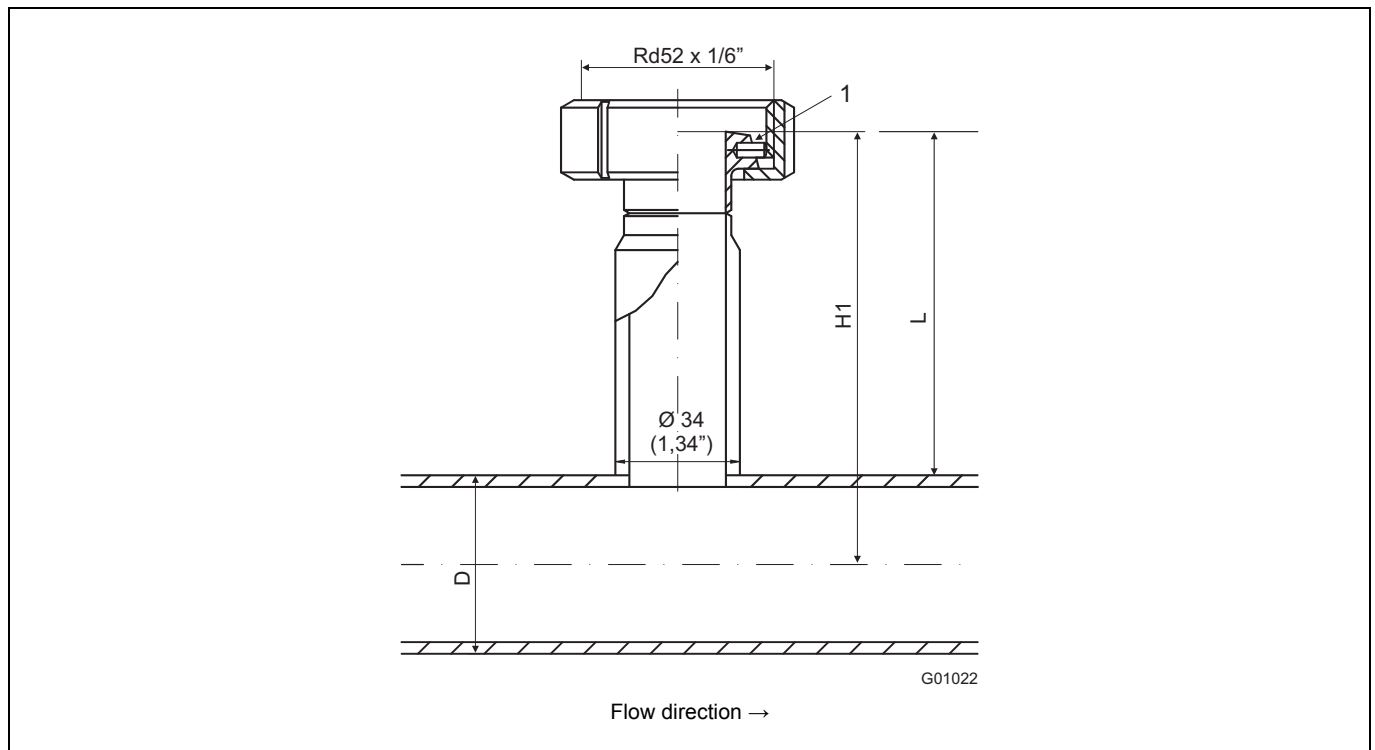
Weld-on adapter DIN 11851 with lock nut. Dimensions in mm (inch)
